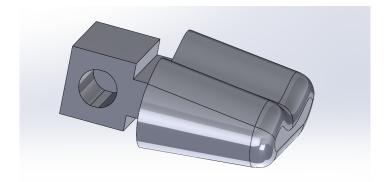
SolidWorks model of one spoke tongue actuator design.
